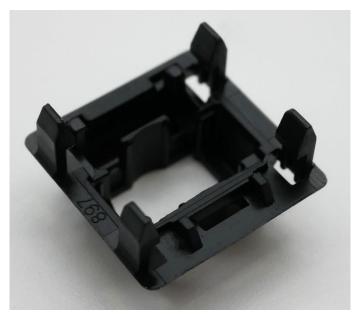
Cherry MX Purple top housing internals showing similarities to other MX2A platform switch housings as well as its triple digit mold marking on left hand edge.
